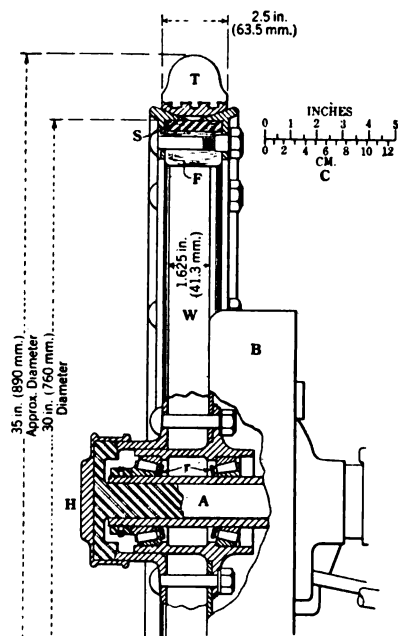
CROSS-SECTION OF REAR-WHEEL BEARING WITH WHEEL AND TIRE
